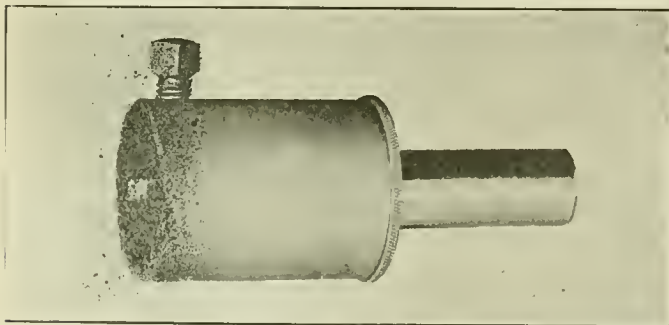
Simplified Warner & Swasey Clutch Tap and Die Holder
